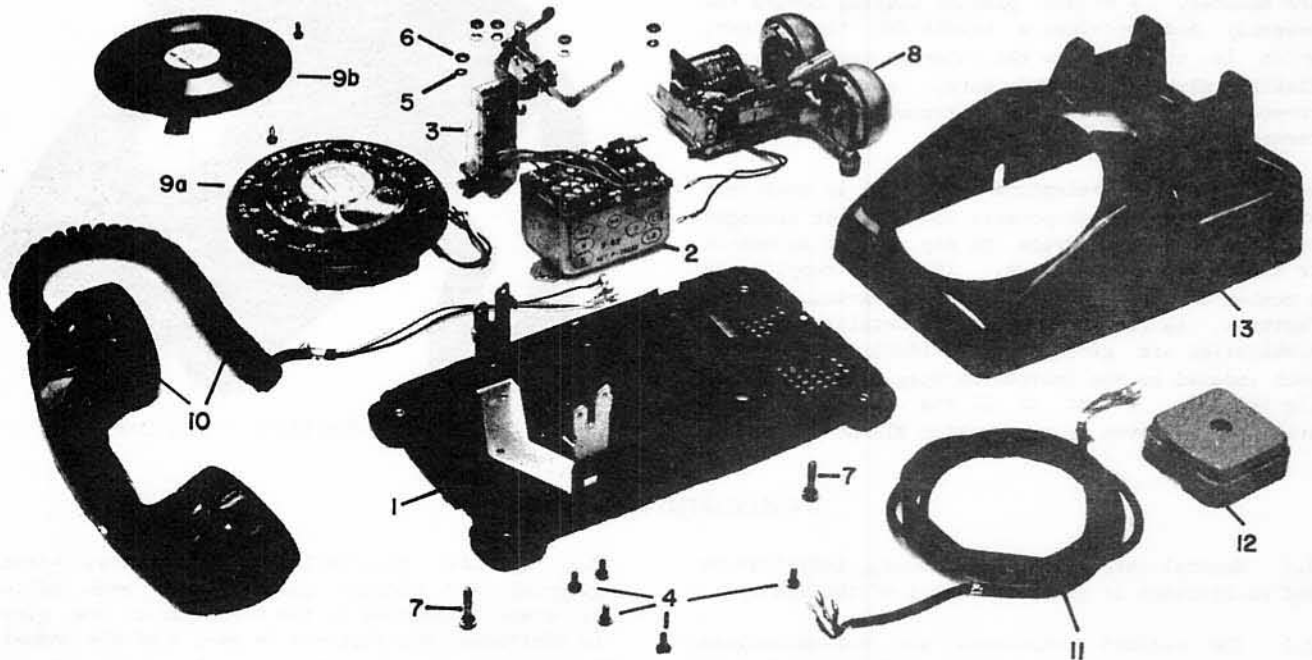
COMPONENT PARTS - EXPLODED VIEW
